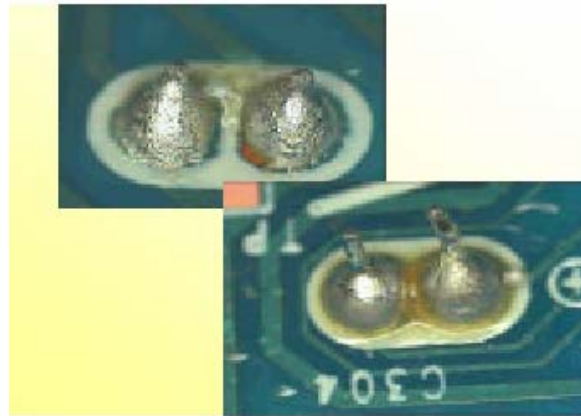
Example of Alloy 7 solder paste-in-hole for through-hole components
